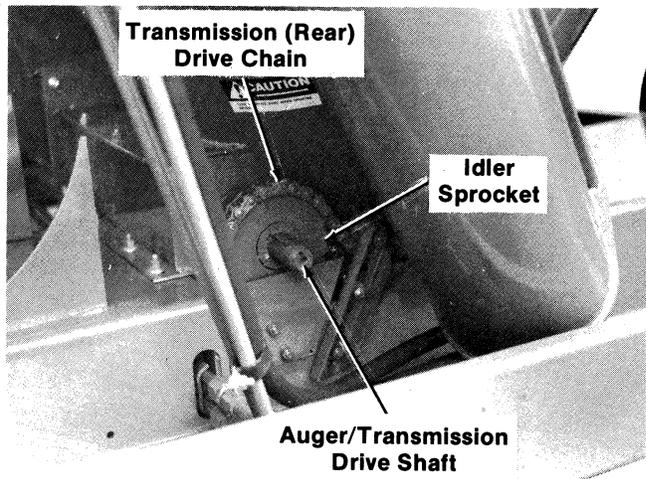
Transmission Drive Chain (with Guard Removed)
